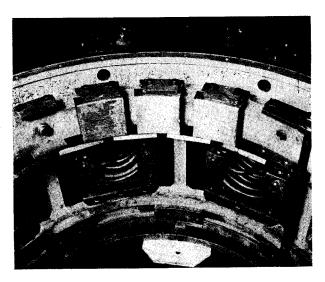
Inside View of Oil Pot of Umbrella Generator Showing Segmental Guide Bearing Shoes and Cooling Coils.
